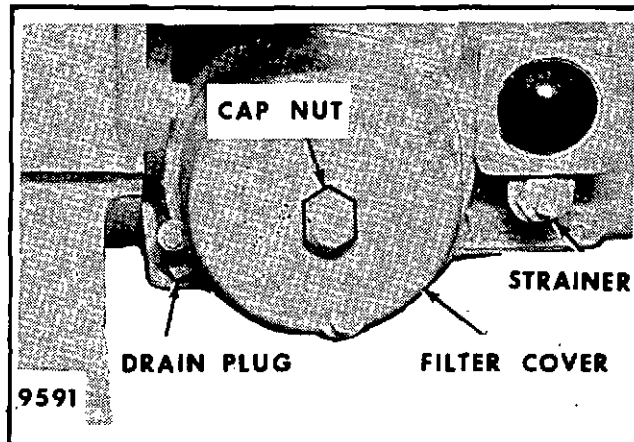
Crankcase Drain Plug (Heat Exchanger Base Pan)
